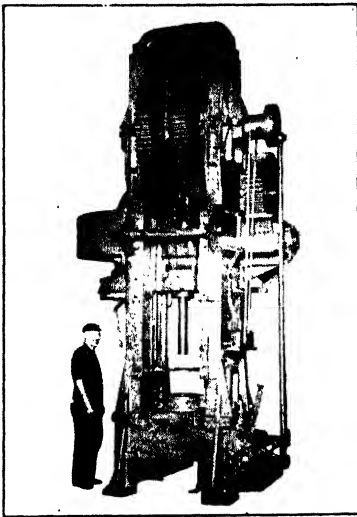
A new type reducing press permitting a 36-in. stroke at 18 SPM.
